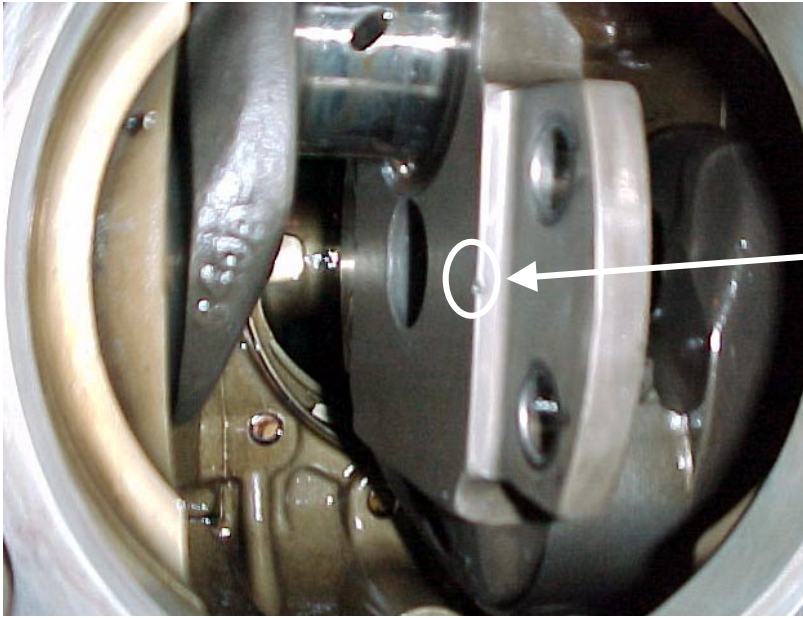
FOCUS INSPECTION IN THIS AREA
